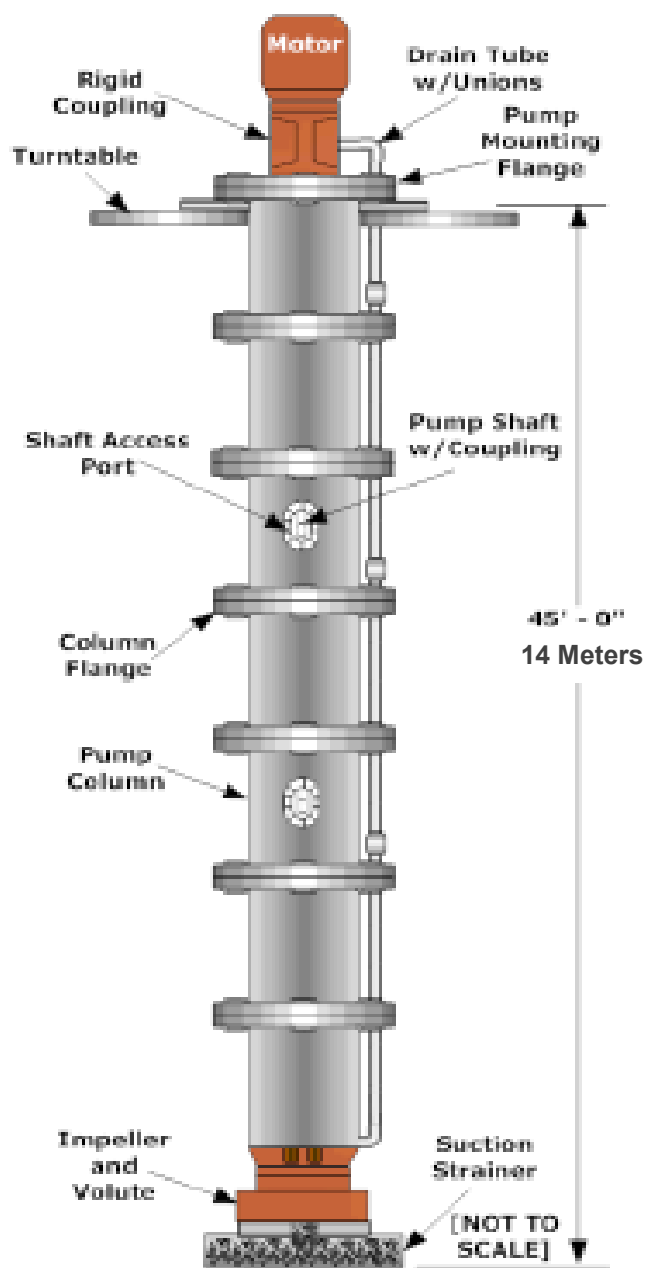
Typical Standard Slurry Pump at SRS (U.S. DOE-SR, 2014).
